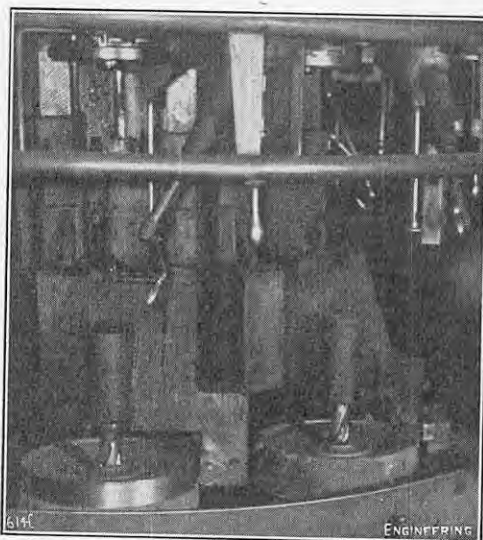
TOOL SET-UP ON FLYWHEEL MACHINE.
